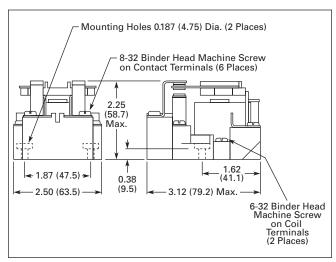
9575H3 DPDT Relay — Approximate Dimensions in Inches (mm)
